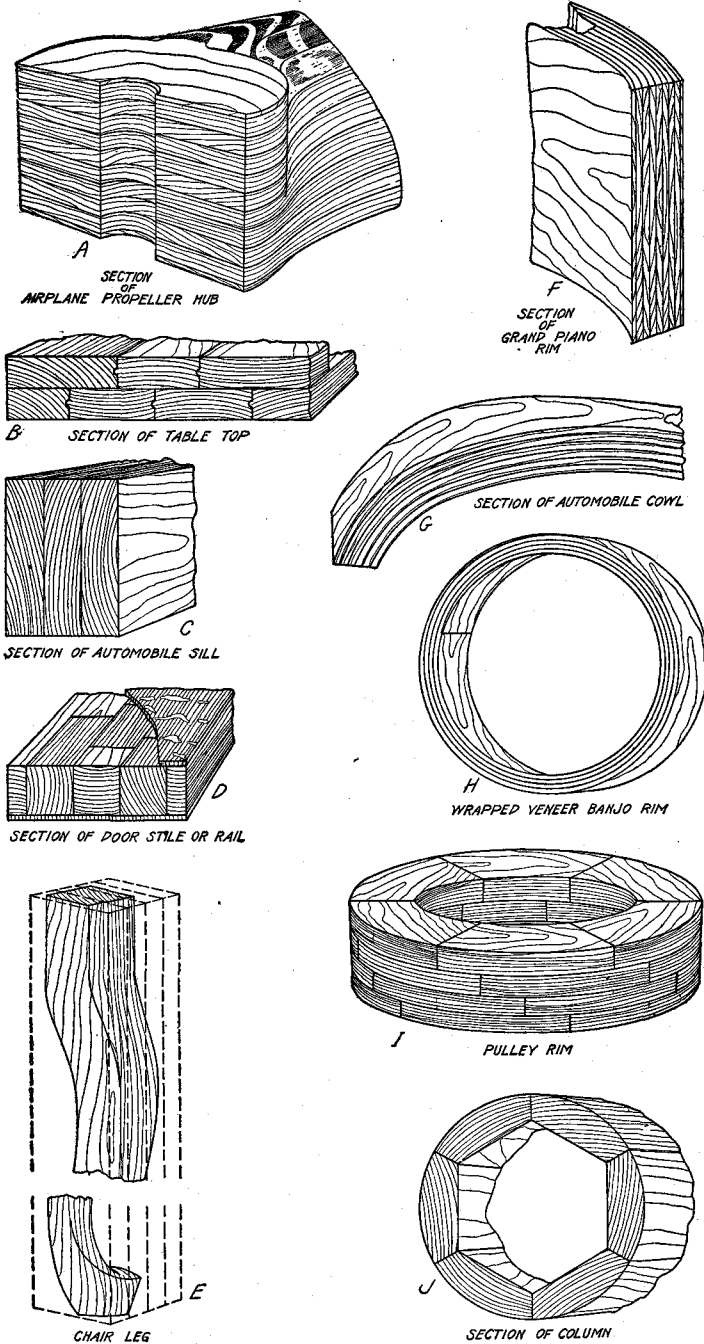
Types of parallel-grain construction: A, Section of airplane propeller hub; B, section of table top; C, section of automobile sill; D, section of door stile or rail; E, chair leg; F, section of grand piano rim; G, section of automobile cowl; H, wrapped veneer banjo rim; I, pulley rim; J, section of column
